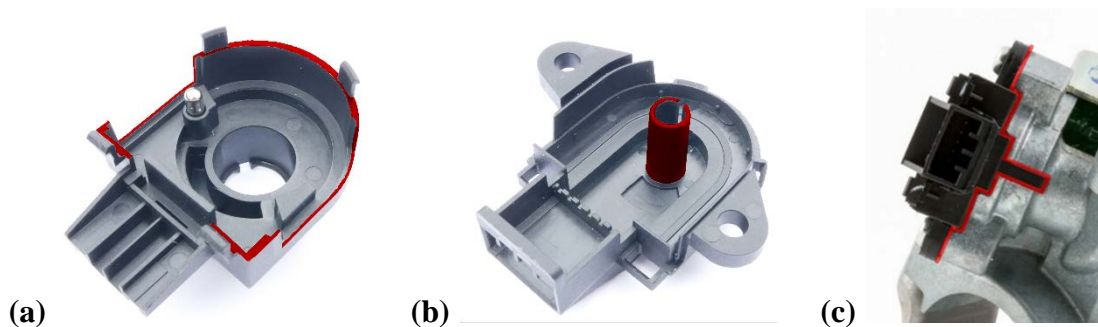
Large contact surfaces between (a) upper and lower housing, (b) lower housing and switch plate, and (c) switch assembly and steering column.
